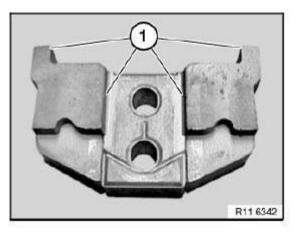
Identifying Guide Block Contact Surface Courtesy of BMW OF NORTH AMERICA, INC.
